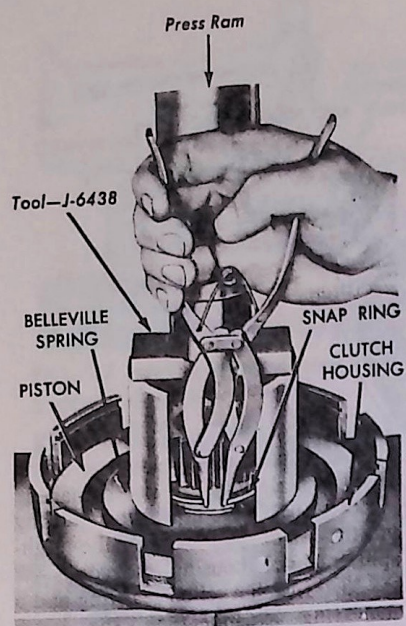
High-Splitter Piston Belleville Spring Snap Ring Removal or Installation
